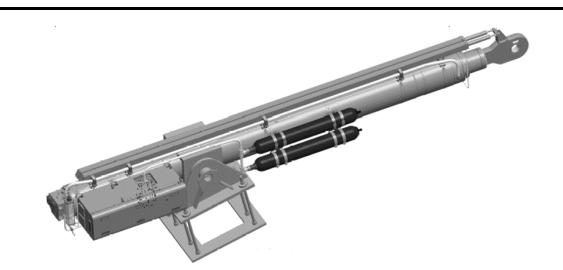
Self-contained hydraulic actuator (courtesy of Van Halteren Technologies)
